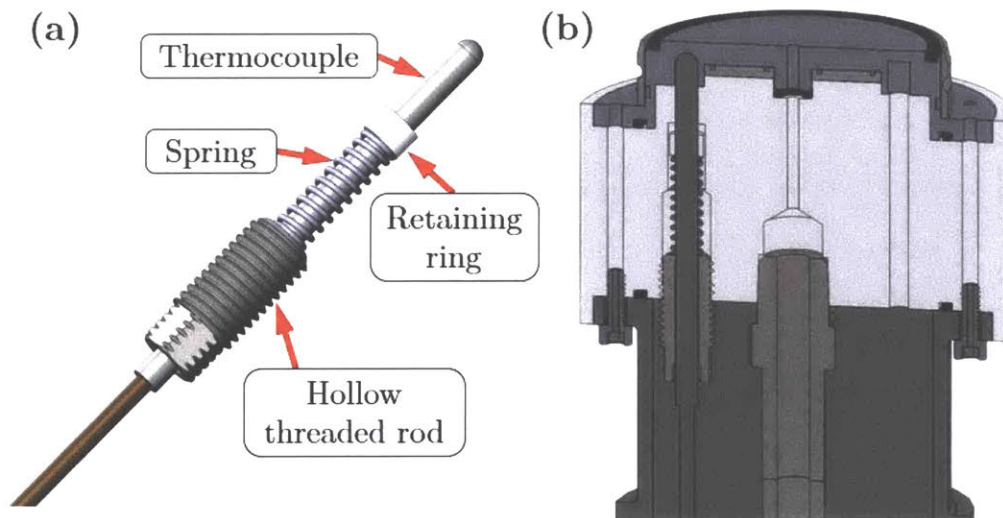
(a) Spring-loaded thermocouple assembly; (b) Cross-sectional view of SCA showing thermocouple position.
